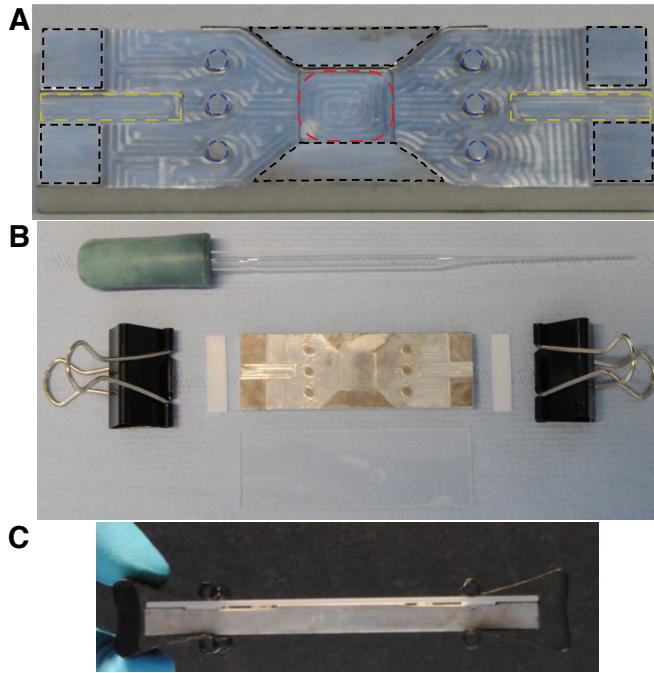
Customized casting equipment. (A) A detailed image of the final casting mold used to cross-link the prepolymer with the color coded features described in the text. (B) Basic additional equipment: a glass Pasteur pipette, a pair of office metallic clamps, white Teflon spacers and a covering quartz microscope-slide. (C) All parts assembled and ready for casting
